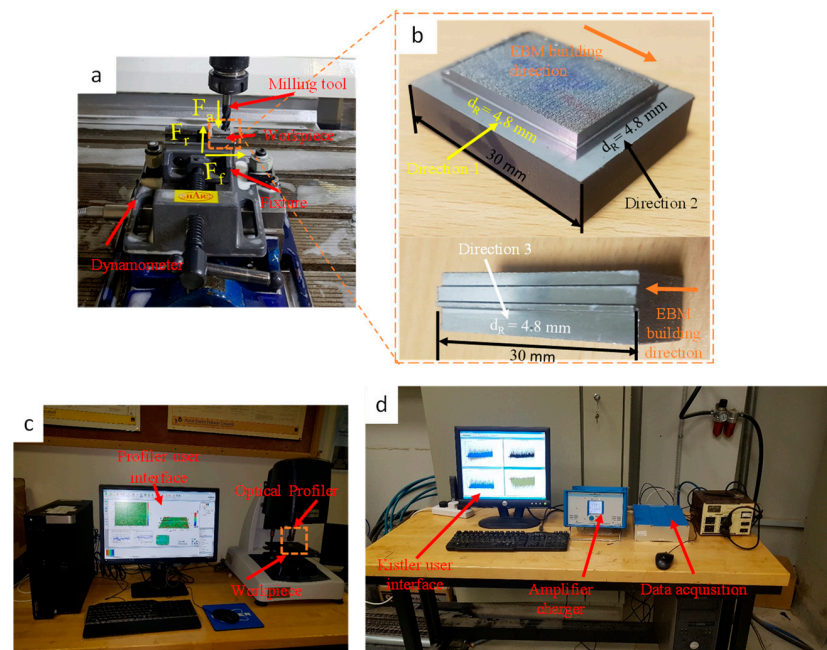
(a) Machining process setup of the EBM-manufactured component; (b) A magnified image of a machined component, showing its orientations, with labels; (c) 3D optical profilometer setup; (d) dynamometer.
